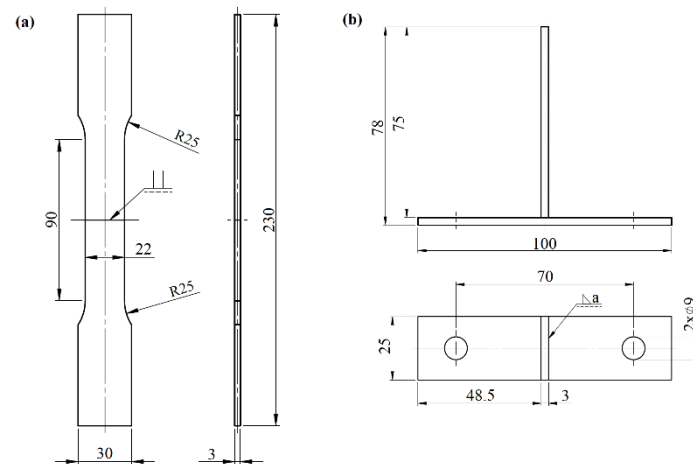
Geometry of a) butt joint specimen, b) T-joint specimen
